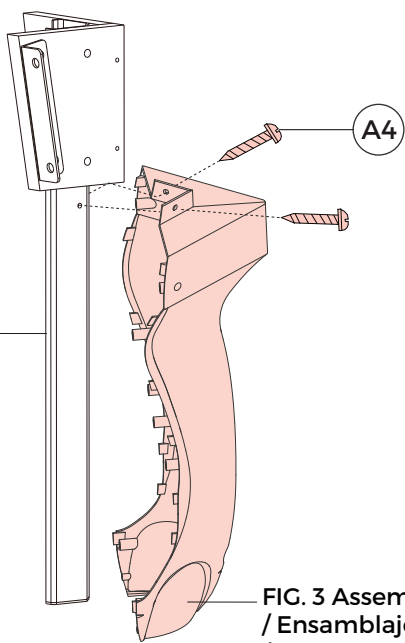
Assembly / Ensamblaje FIG. 3 / FIG. 3 Assemblage
